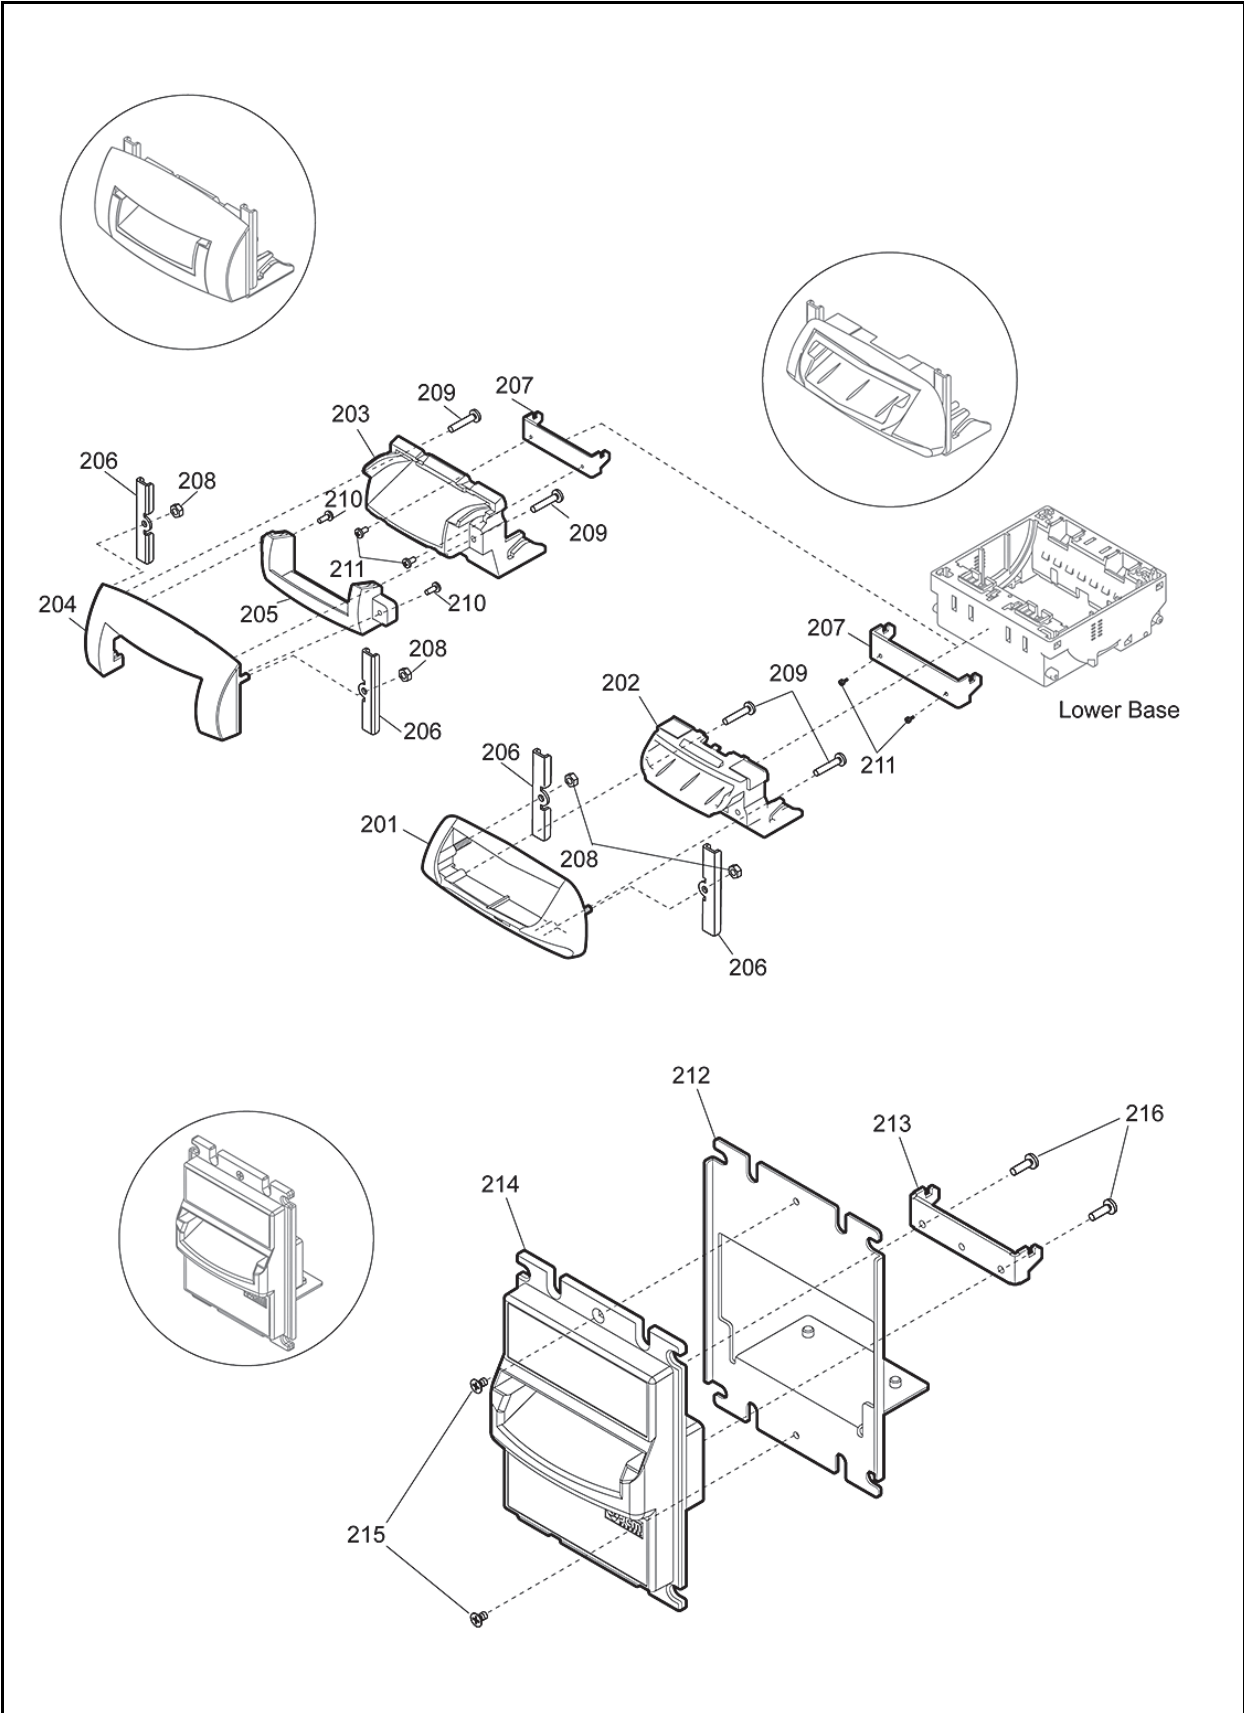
Taiko PUB-7/11 Bezel Unit Exploded View
